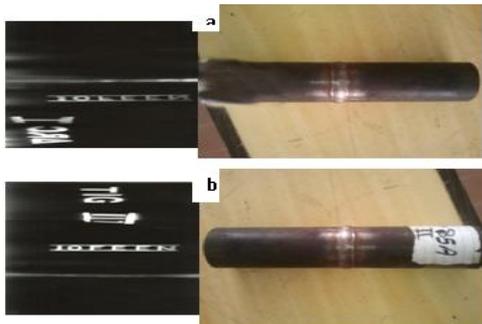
XRD of the pipe after welding by a) SMAW and b) GTAW techniques
